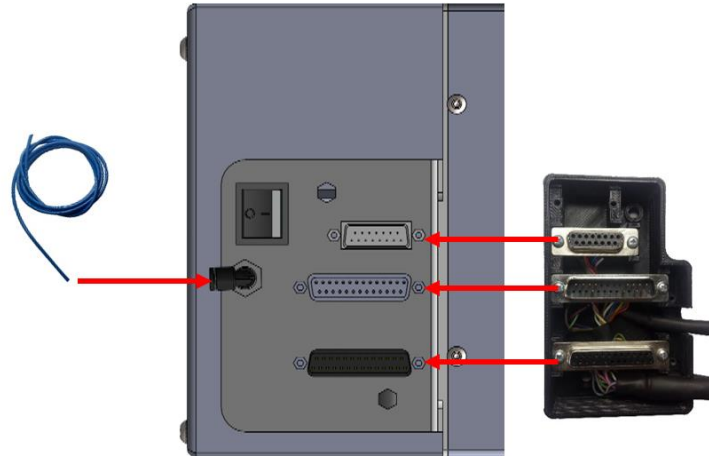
Contact, Screen, Power Cable Sockets from Printer Side
